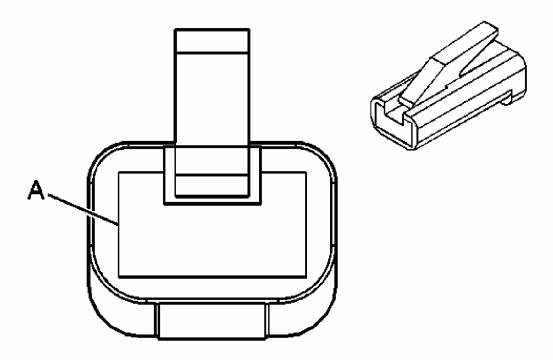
Park Brake Switch Connector End View Courtesy of GENERAL MOTORS CORP.
